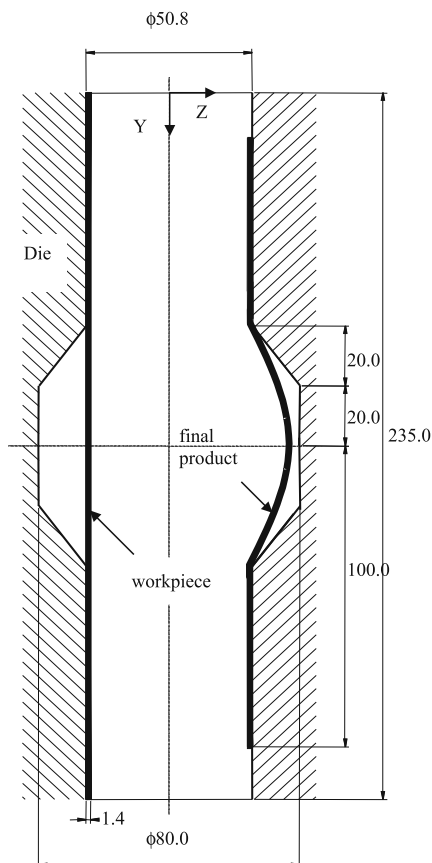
Dimensions (in mm) and configurations of die and final bulged part
